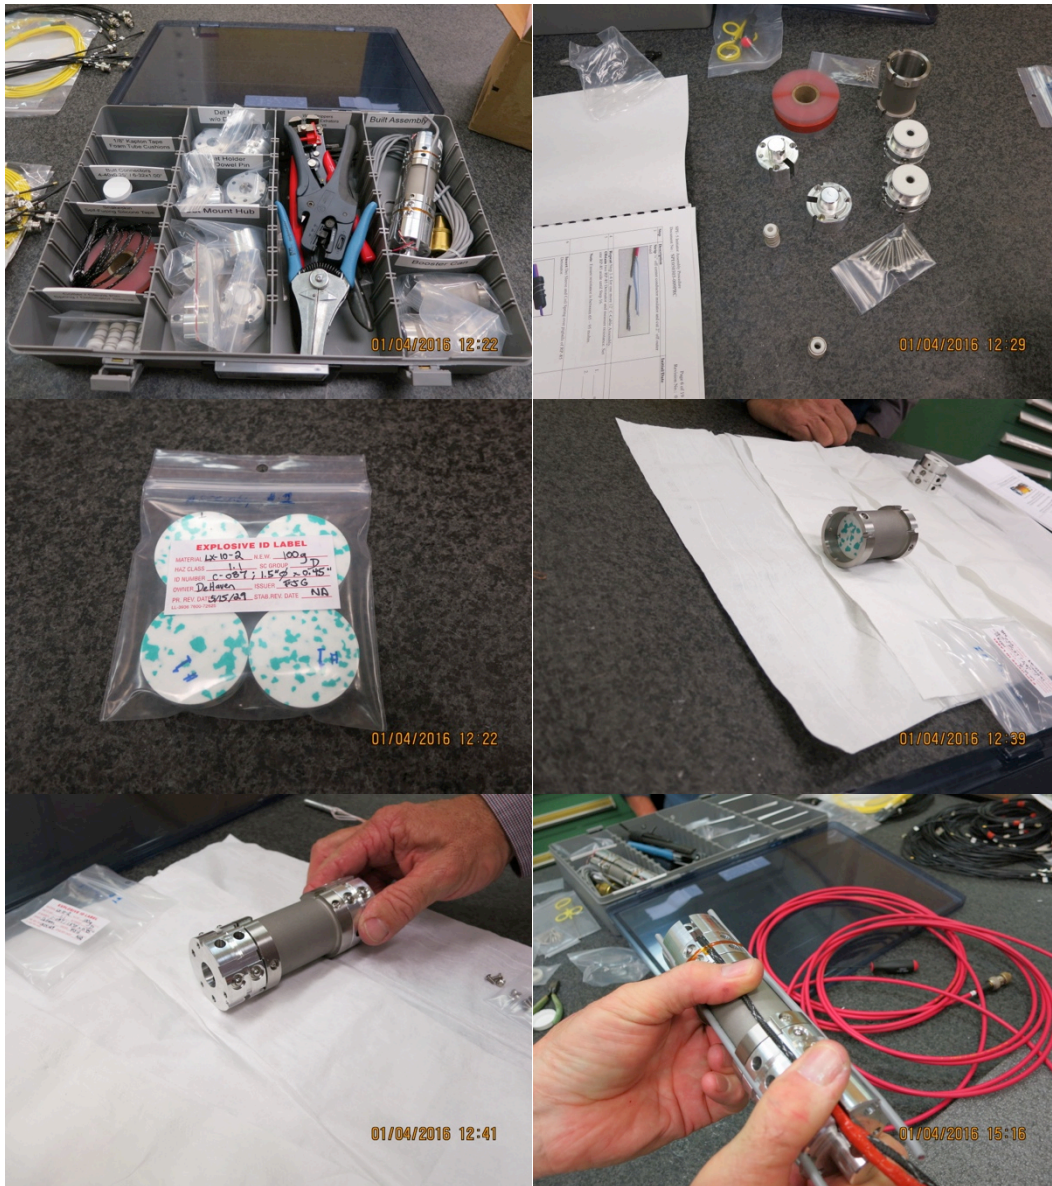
A series of photographs showing the booster assembly, including the booster parts kit (upper left), arrangement of the assembly parts (upper right), LX-10 booster pucks (center left), placement of the booster pucks inside the booster housing (center right), attachment of the booster ends (lower left), and attachment of the booster, pin and “water sensor dummy wire” connections (lower right).
